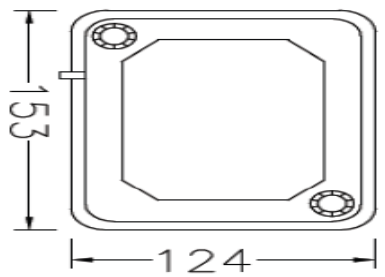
Case and panel cut-out dimensions for case 1/2 N Ver. (all dimensions in mm)
